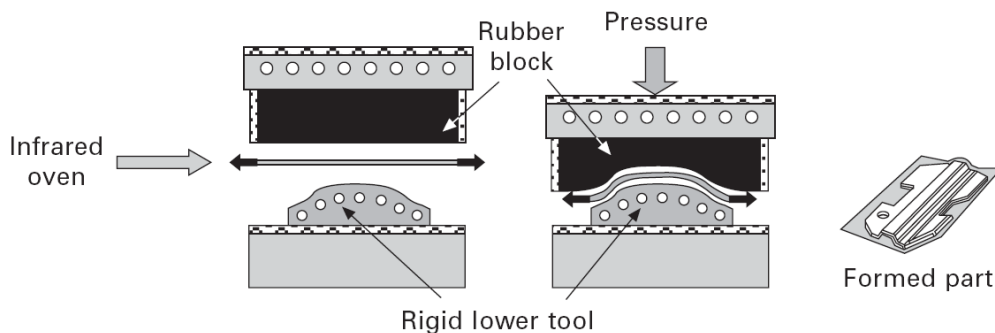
Elastomeric pad (rubber block) forming [4].
